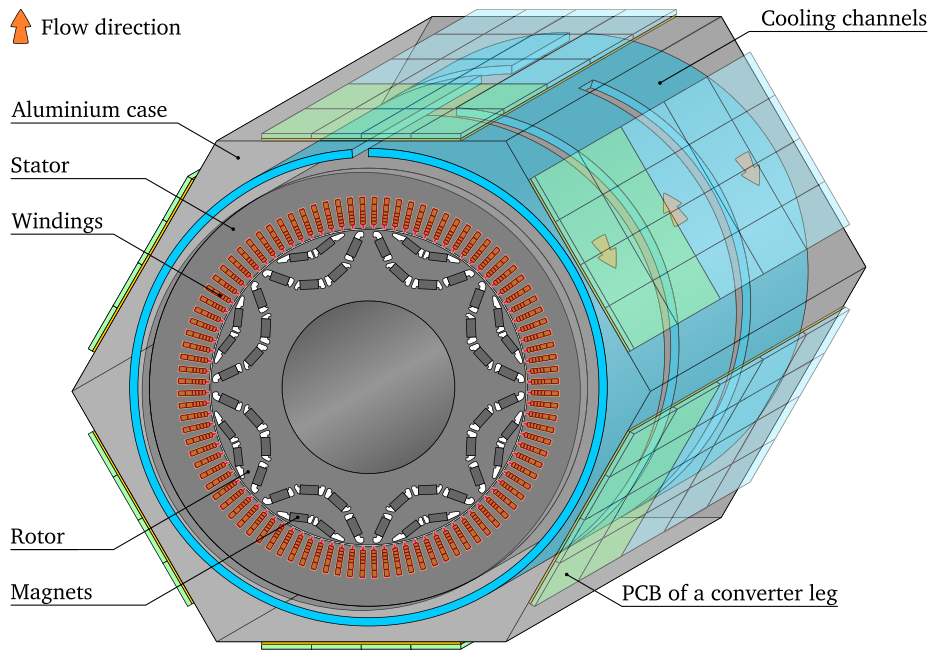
Three-dimensional schematic of the integrated assembly including the traction motor, the six PCBs making up the power converter, and the hexagonal case allowing for the integration of the two systems and the cooling of all heat-generating components.
